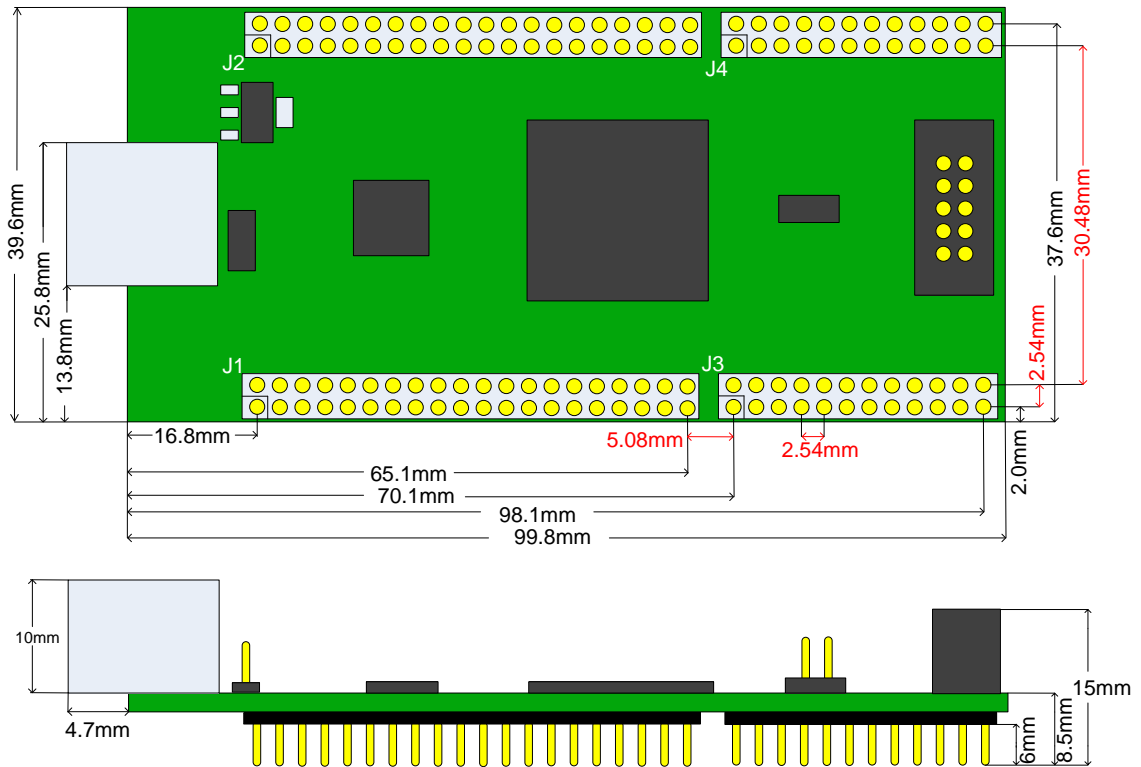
Morph-IC-II Dimensions (Top and Side View)
